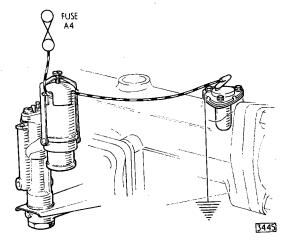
Wiring circuit for the auxiliary starter carburetter to the thermostatic switch.
